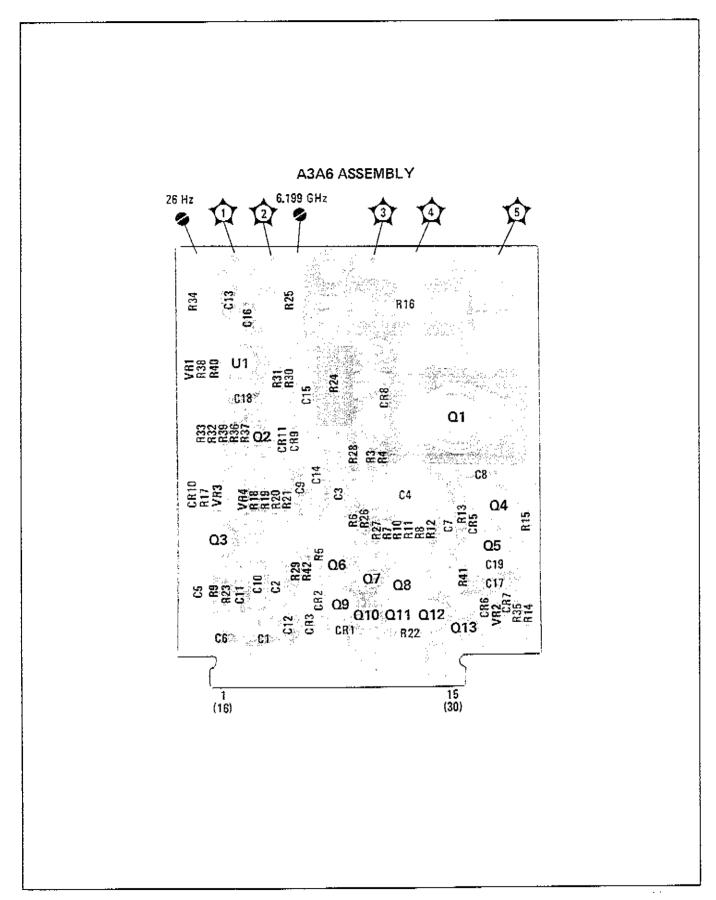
A3A6 YTO Main Coil Driver Assembly Component, Adjustment, and Test Point Locations
